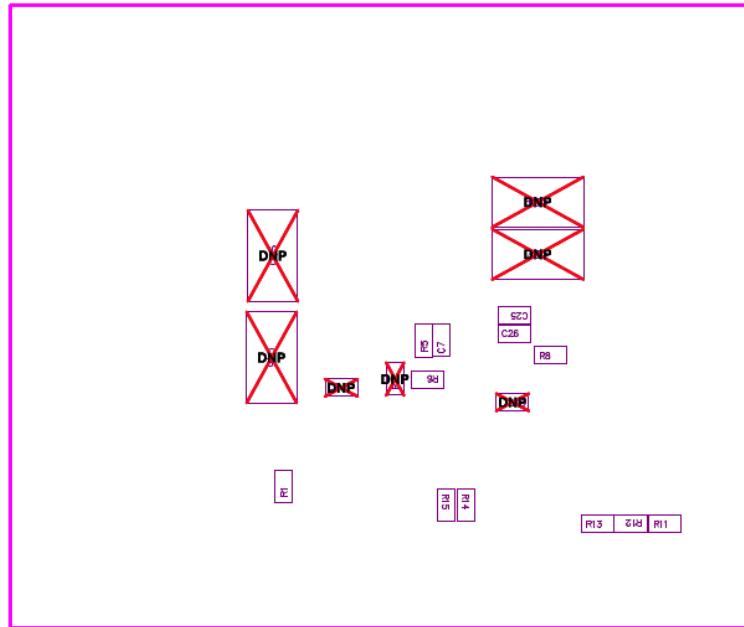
TPS548A20EVM-587 Bottom-Layer Assembly Drawing
